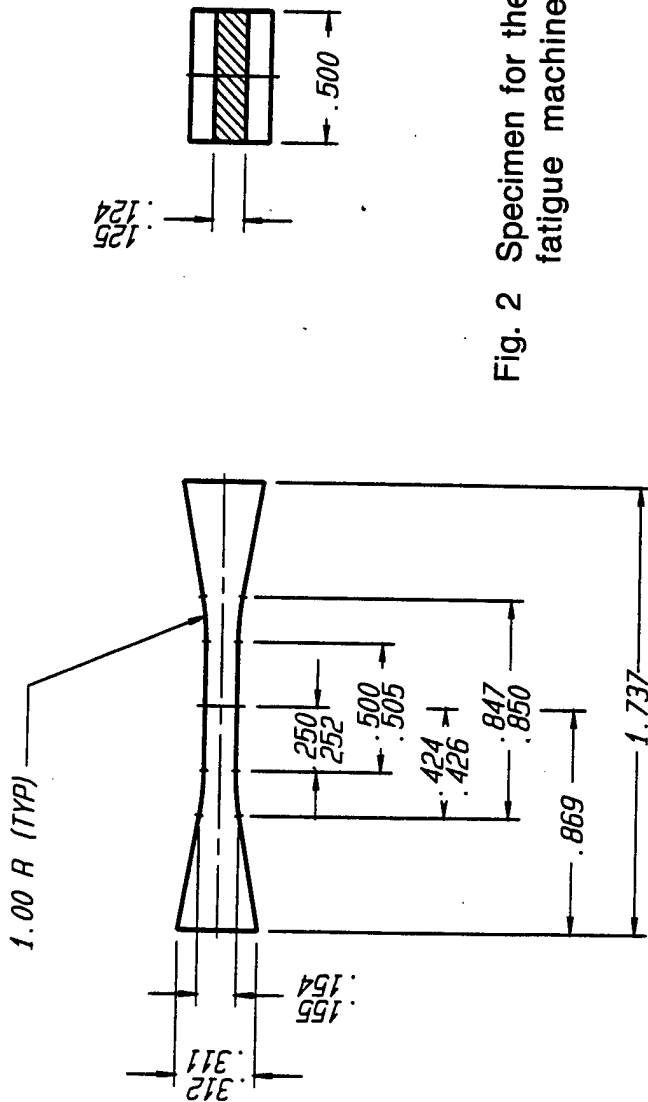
Specimen for the SwRI 1.5 kHz fatigue machine.
